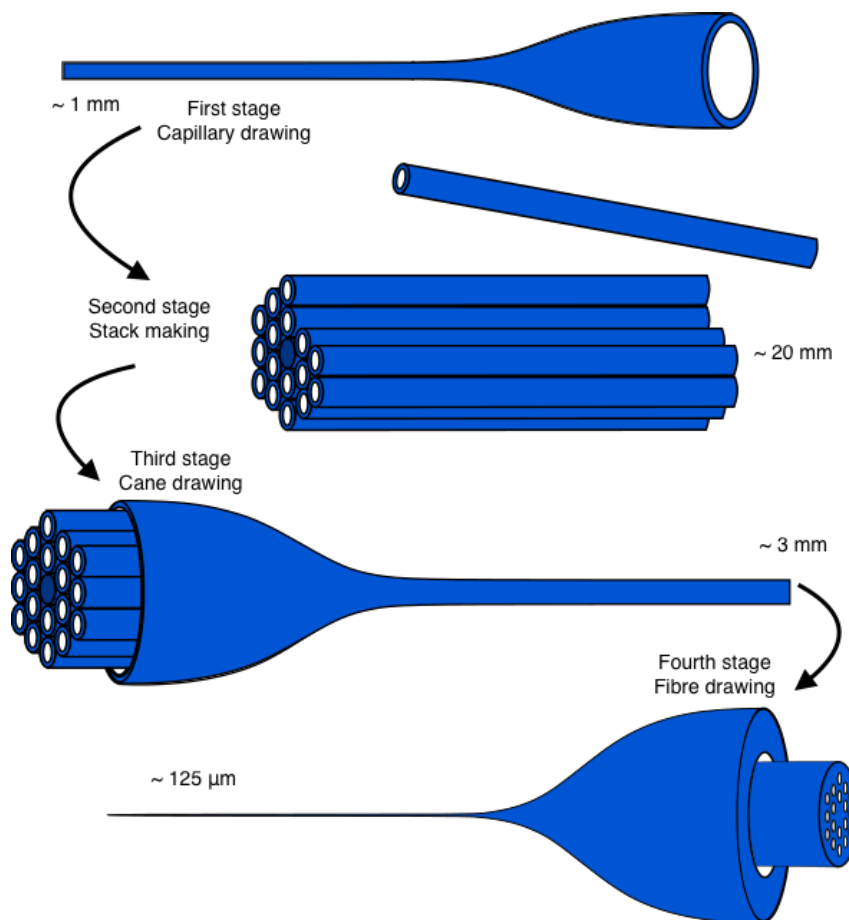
Stack and draw technique for the fabrication of PCFs.
